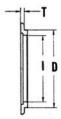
Plate spring retainer thickness (T) should measure 2.6-2.8 mm, inside diameter (I) should be 57.6-57.8 mm and retainer hub outside diameter (D) must measure 65.7-66.0 mm.
